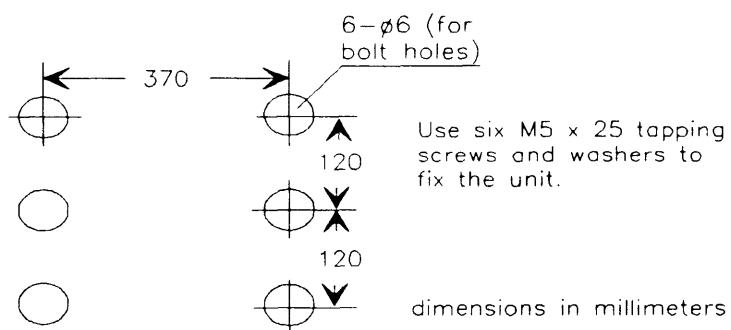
Mounting Dimensions of the Rectifier Unit
